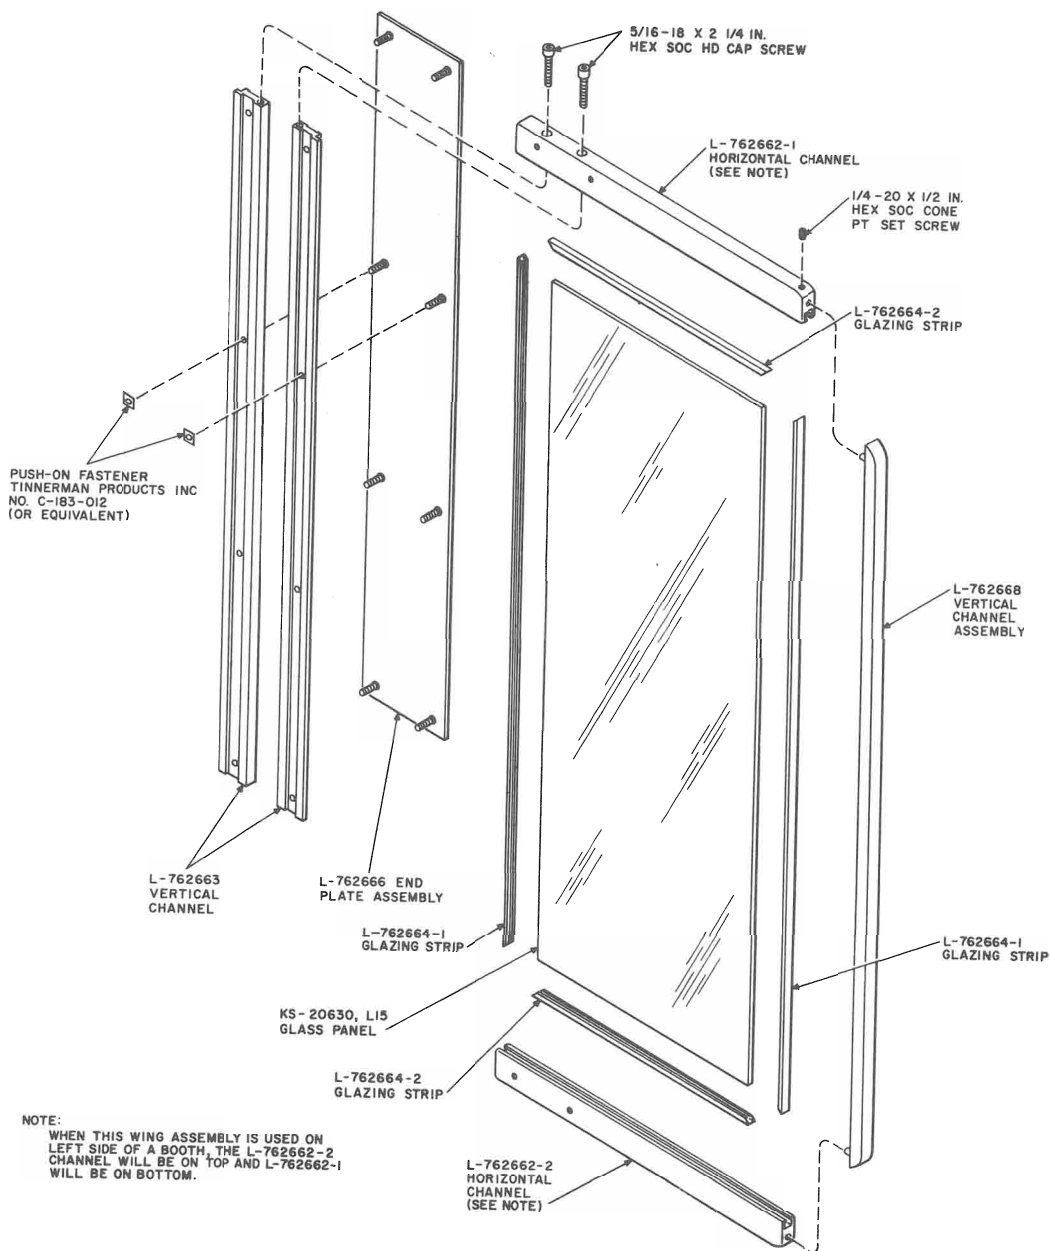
Exploded View of KS-20630, List 11 Wing Assembly
